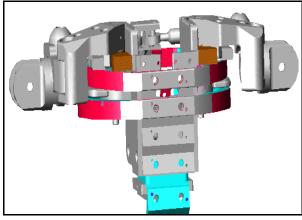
Proper Positioning of Rib # 2 Assembly
